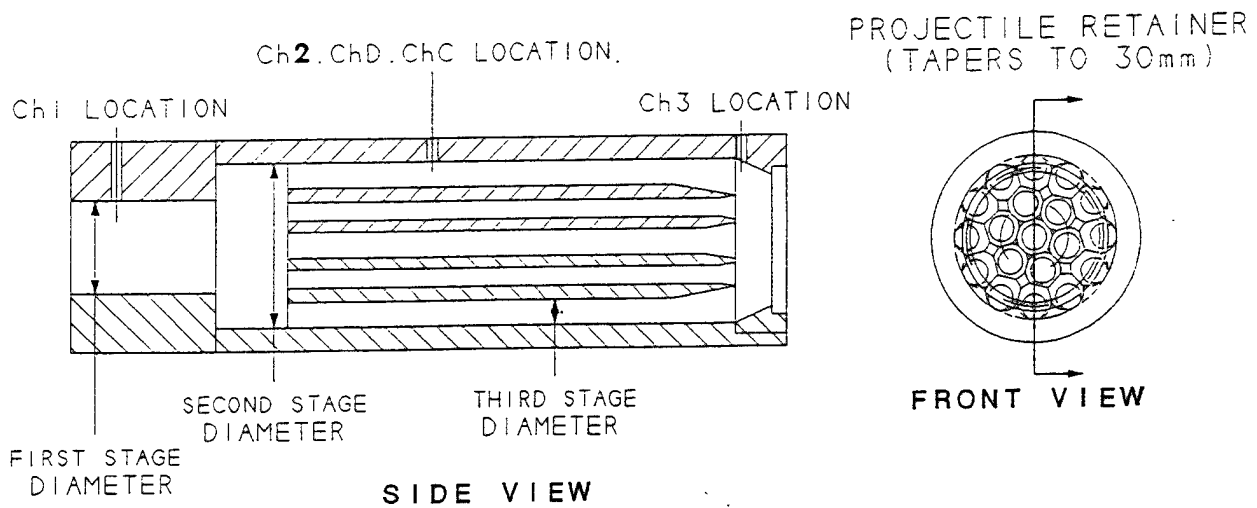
Extended multichamber insert design for 30-mm gun tests.
